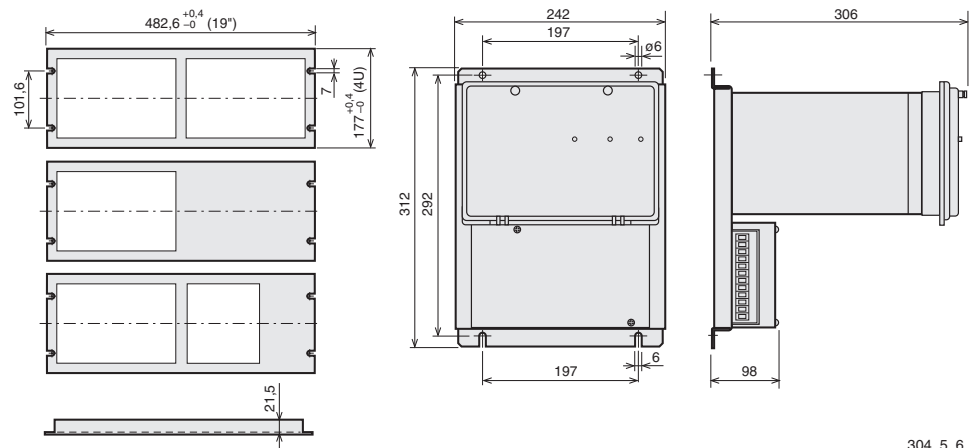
Mounting cabinets and frames as well as projecting mounting (dimensions in mm)
